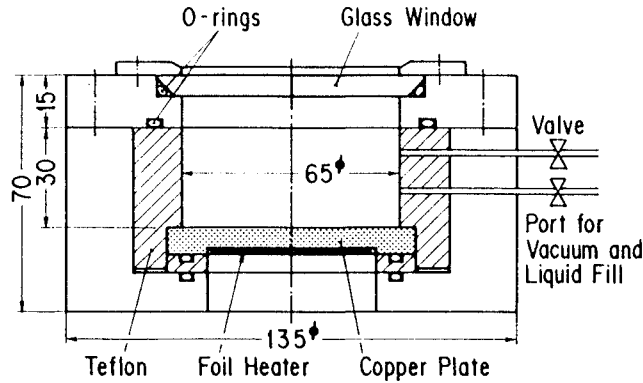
Rough drawing of test vessel for film thickness measurement.
